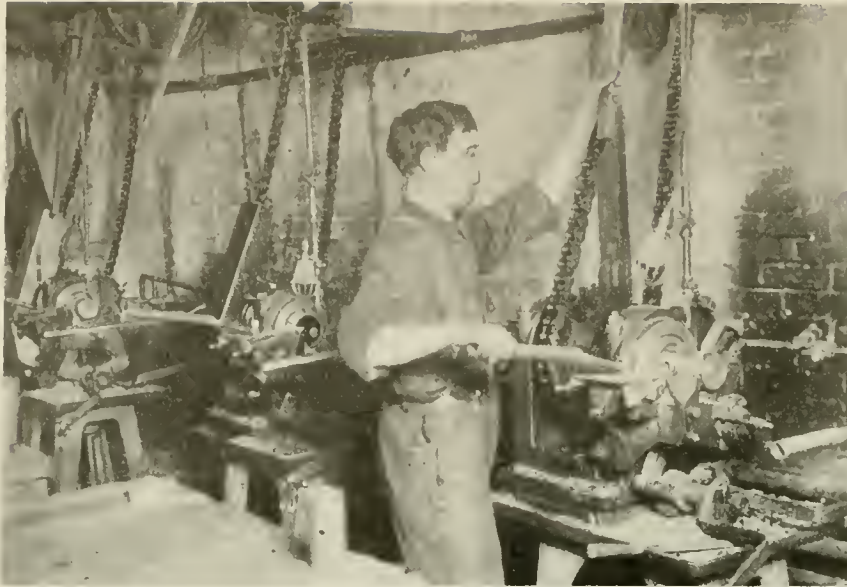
"LYMBURNER" SPECIAL LATHES OPERATING ON WAVES AND GROOVE.
